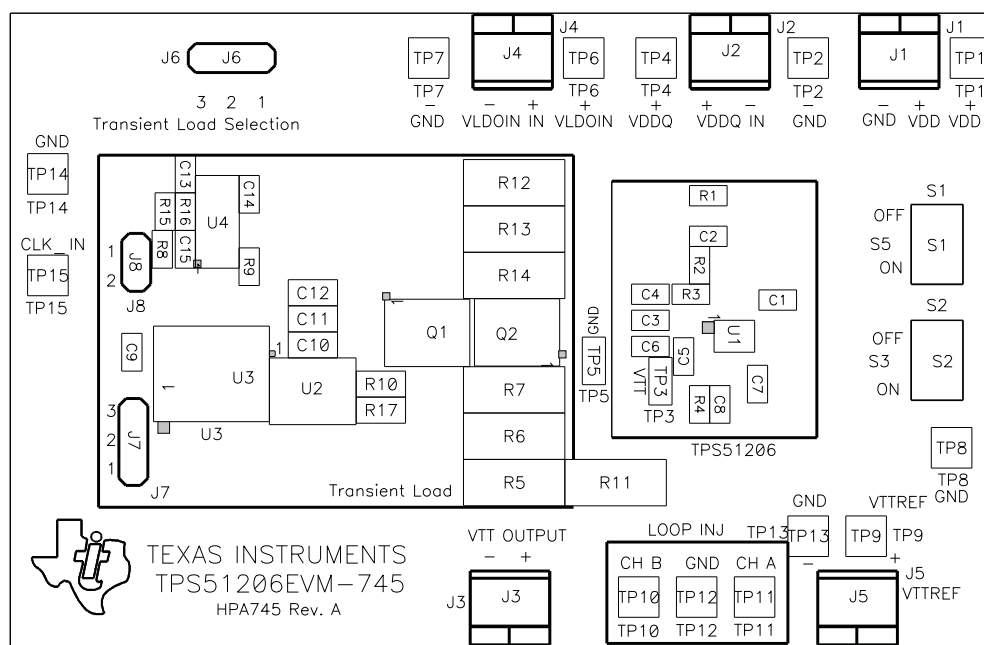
TPS51206EVM-745 Bottom Layer Assembly
